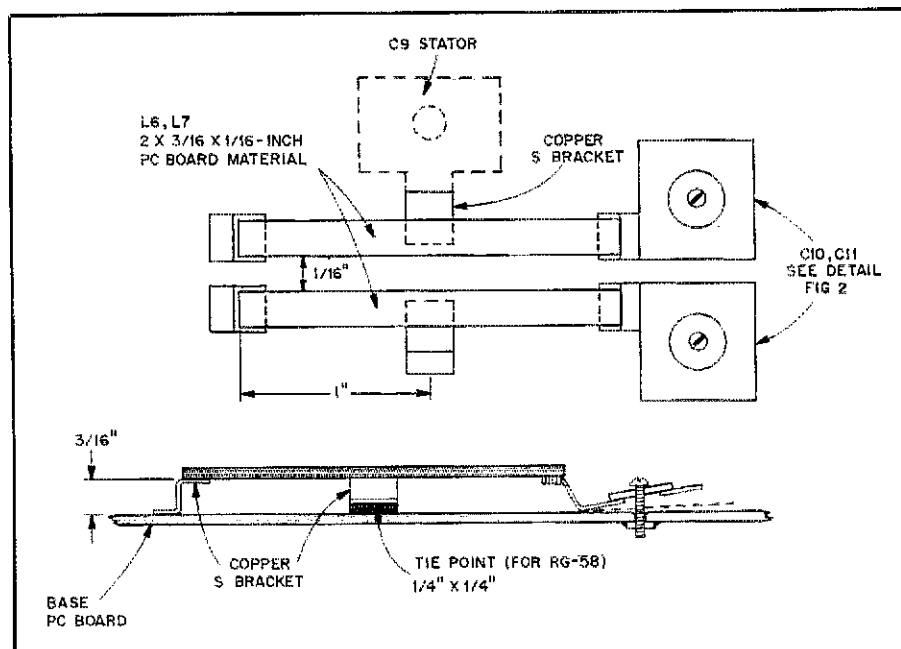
Construction details of the double-tuned output filter. The assembly is supported by copper brackets and parts of the variable capacitors.
